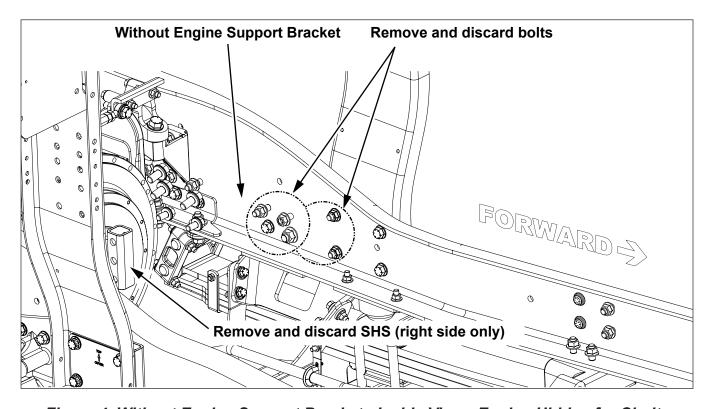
, Without Engine Support Bracket - Inside View - Engine Hidden for Clarity
